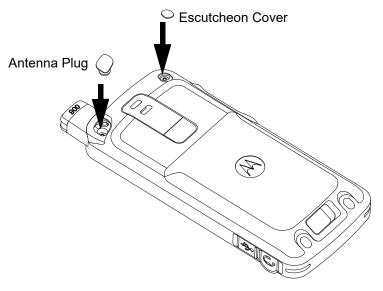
Antenna plug and screw plug re-assembly for 900 MHz
